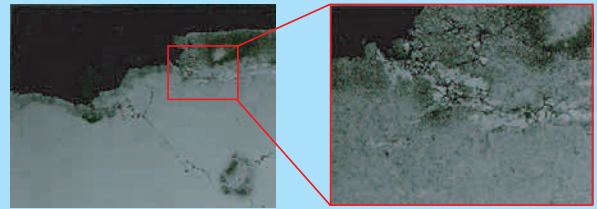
Premature flaking of a pulley support bearing (Case 2)
